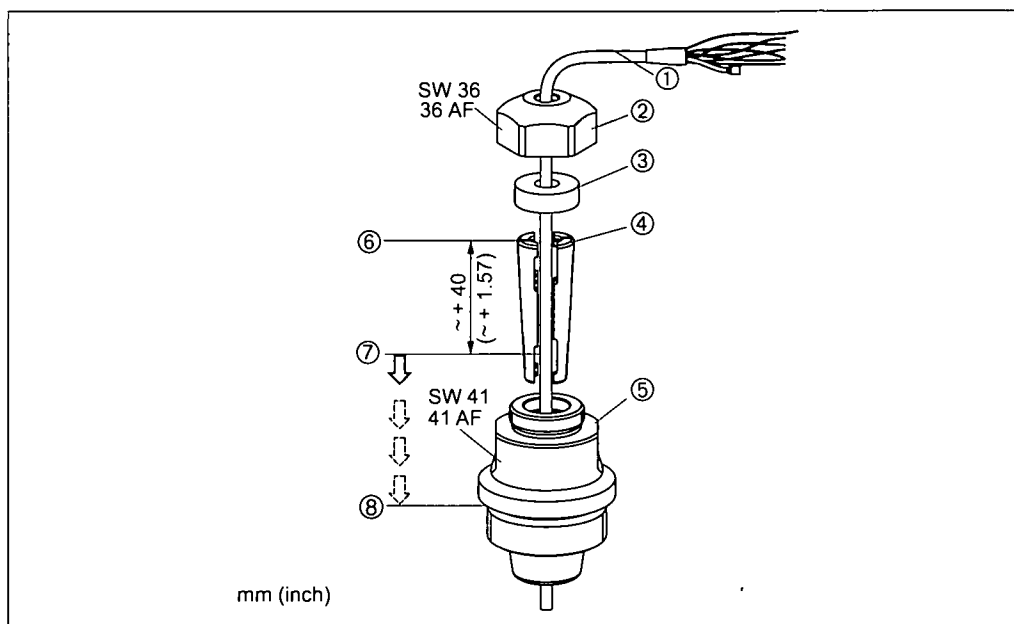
Mounting with extension cable mounting screw, here illustrated with thread G 1 1/2
